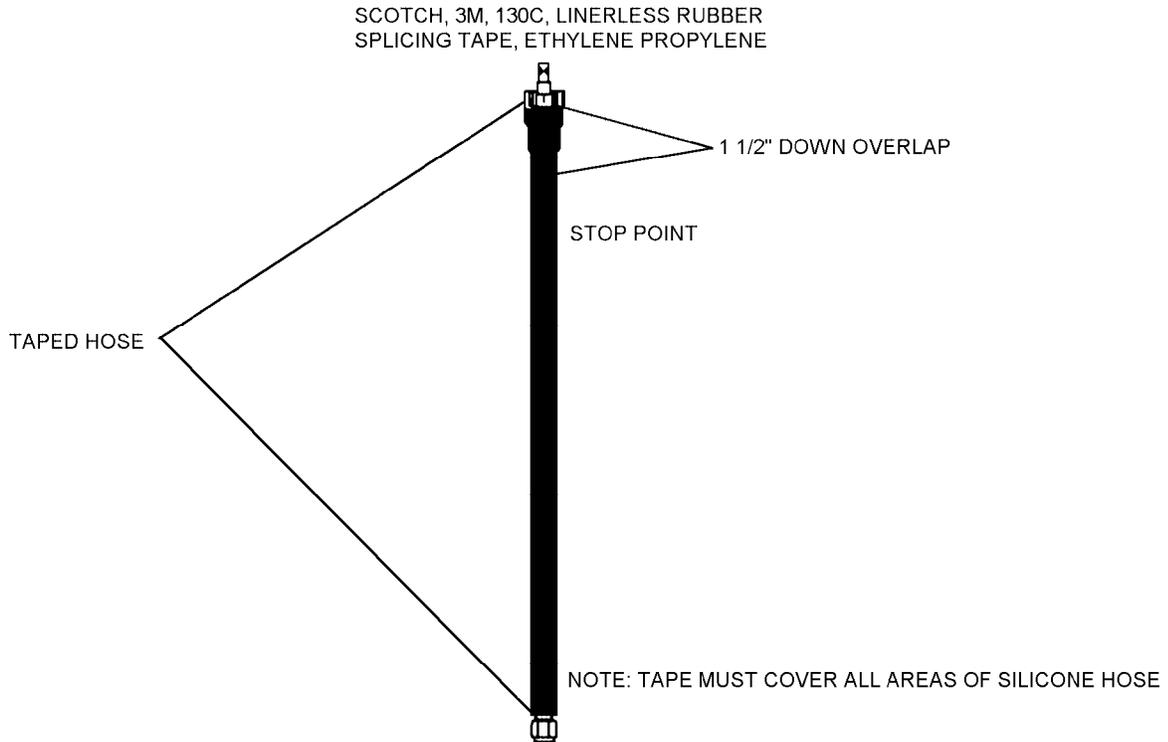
Seat Kit to Aircraft Console Hose Assembly Taping
